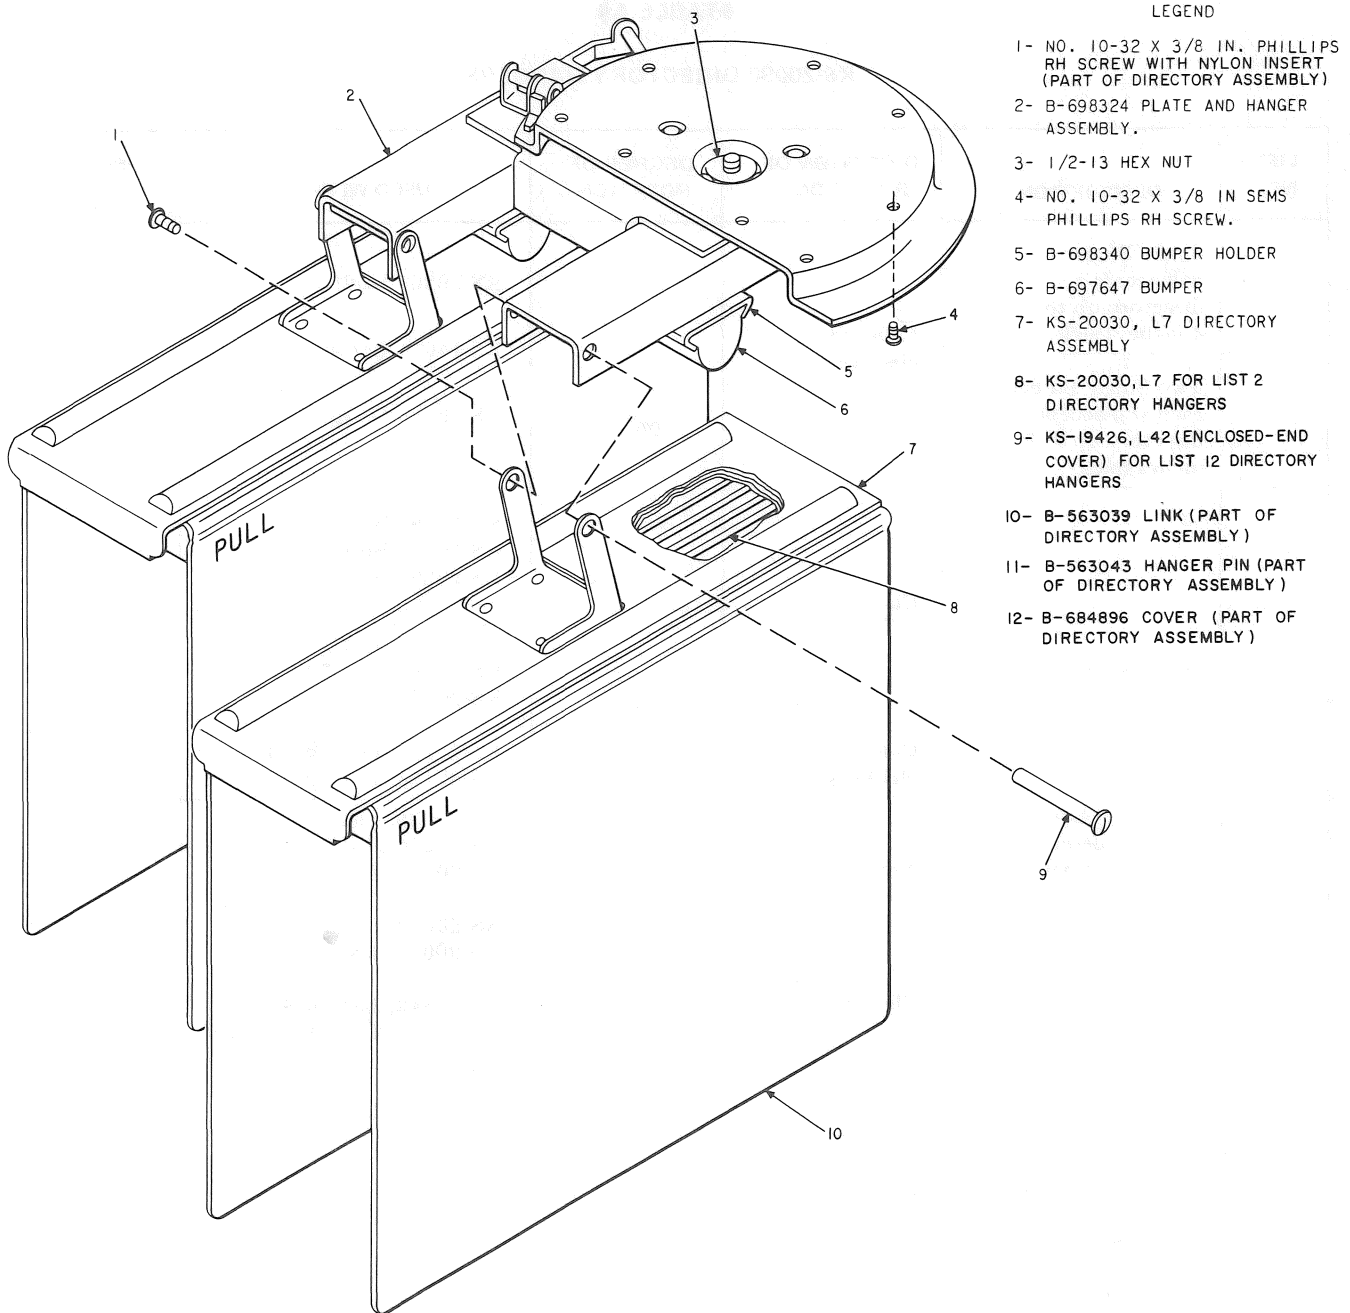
KS-20030, List 2 Directory Hanger (Typical for Double Binder)
